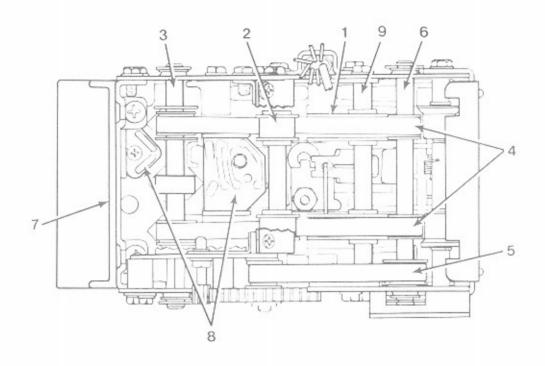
OBA-2 Transport Assembly (Sheet 2)
